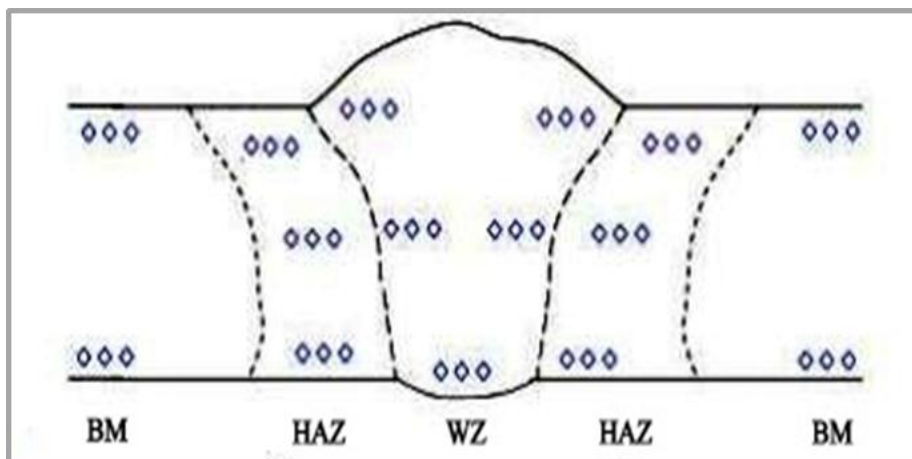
Making Vickers hardness impressions on welding joint
